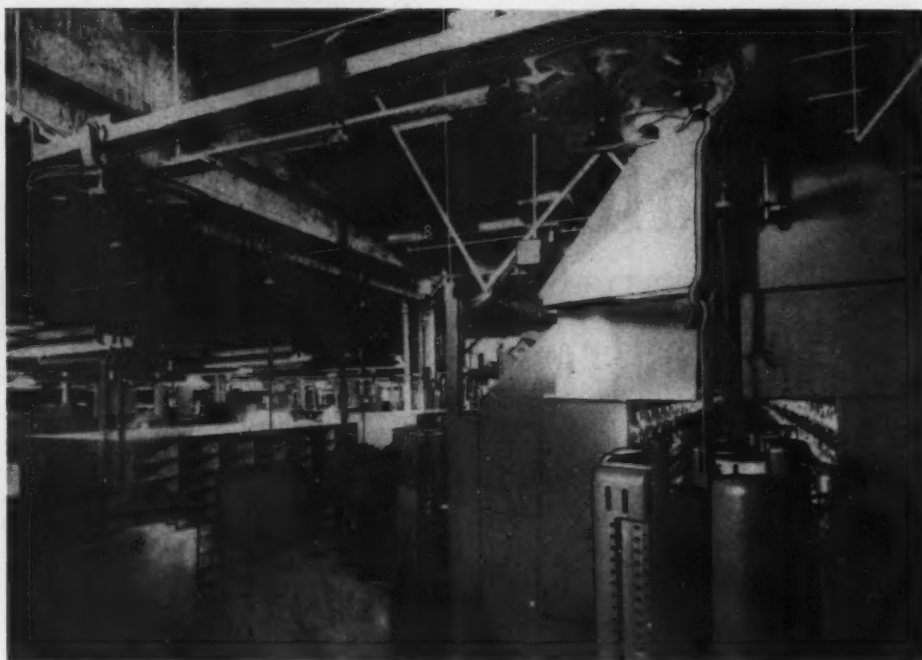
Parts emerging from the infra-red baking tunnel enroute to the assembly section shown at the left.
